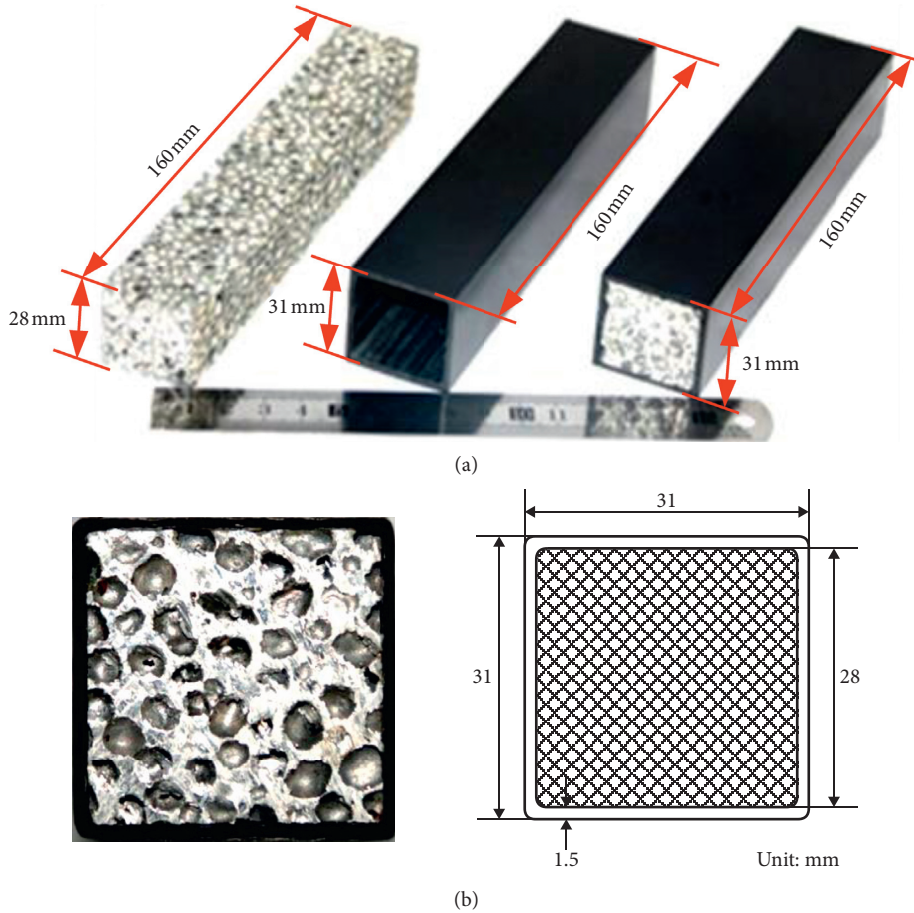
Schematic of (a) specimens in three-point bending test and (b) cross-sectional morphology and dimension of the CFRP square tube filled with aluminum foam.
